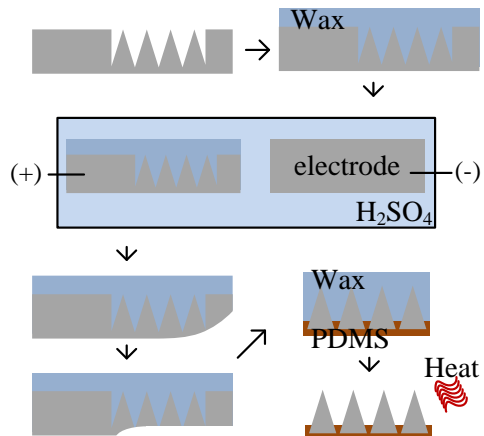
Manufacturing process of flexible base micro-pin array using laser beam machining and electrochemical etching
